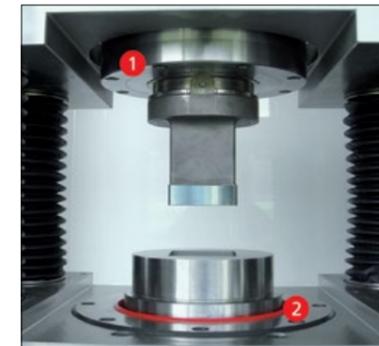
Erowa PM Tooling: Press adapter with PM Tooling punch chuck (1) and die-plate chuck (2)
